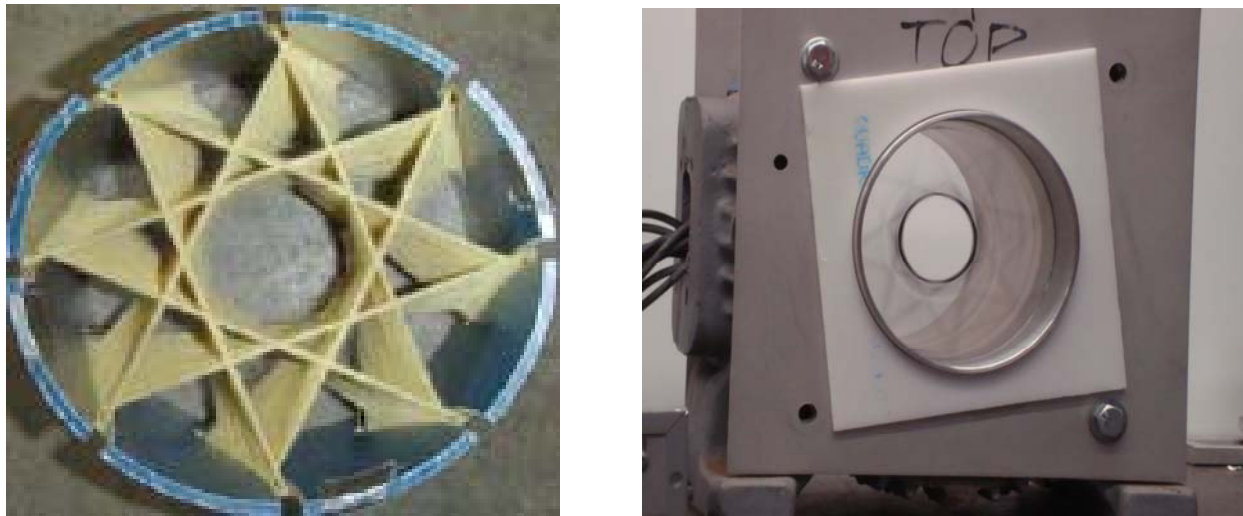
Composite impeller wheel integrated with mandrel (left) Demonstrate with frequency inverter drive @10,000RPM (right)
